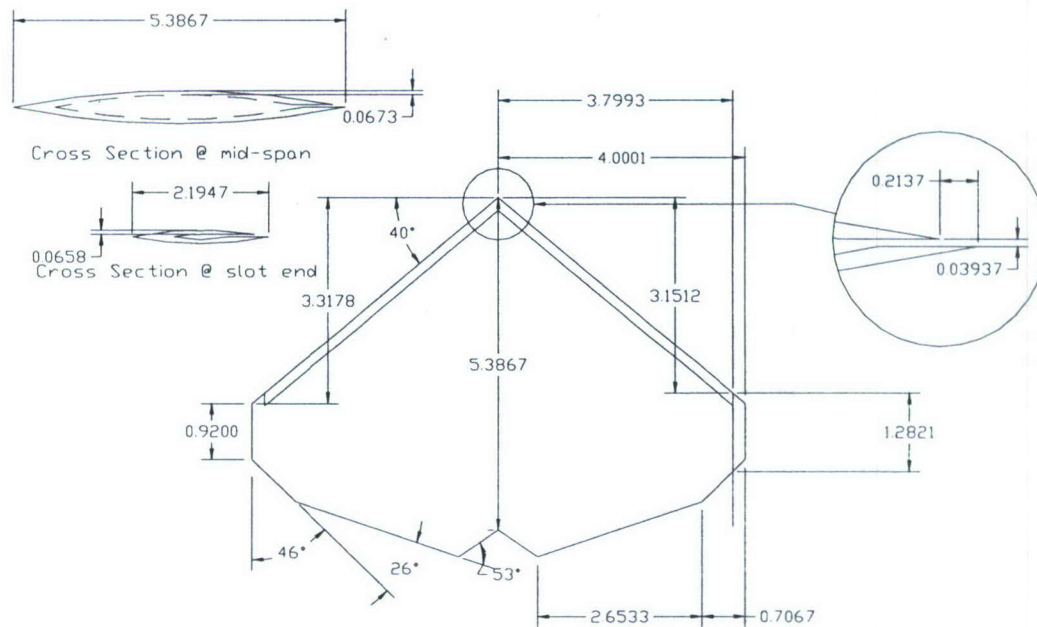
Engineering drawing of the trapezoidal planform model for water tunnel testing.
